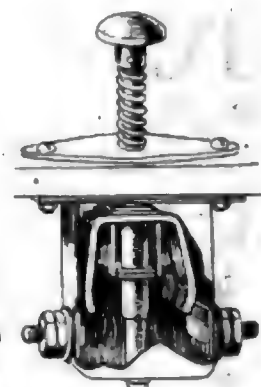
Example of thrust type of switch in which an end or thrust movement performs the operation
